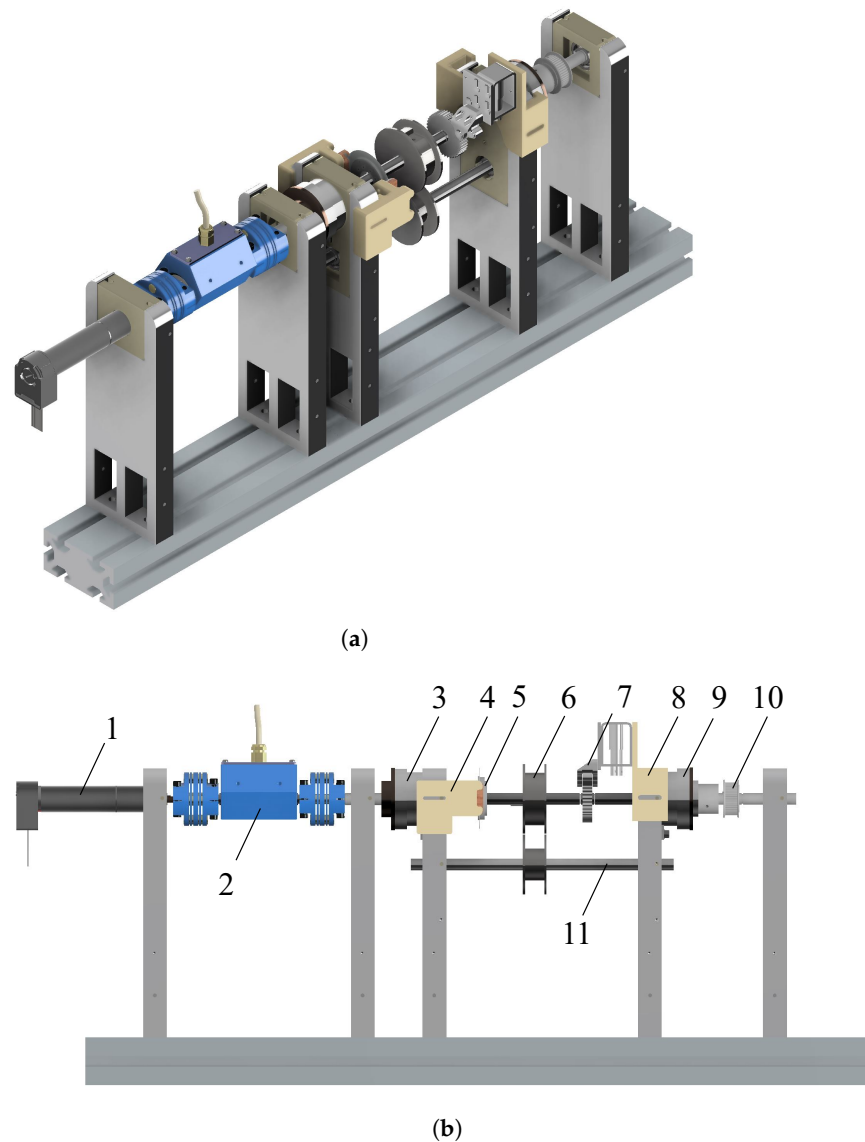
Different views of the constant torque unit that is driven by a high-speed motor (EC4-Pole motor). This unit consists of (1) a DC motor, (2) a torque sensor, (3) an electromagnetic clutch on motor side, (4) a supporting piece for the encoder reader, (5) an optical encoder disc, (6) a constant torque spring, (7) a ratchet and pawl system, (8) a supporting piece with solenoid, (9) an electromagnetic clutch on load side, (10) a pulley, (11) an auxiliary axis for the constant torque spring. (a) Panoramic view of the constant torque unit with high-speed motor. (b) Side view of the constant torque unit with high-speed motor.
